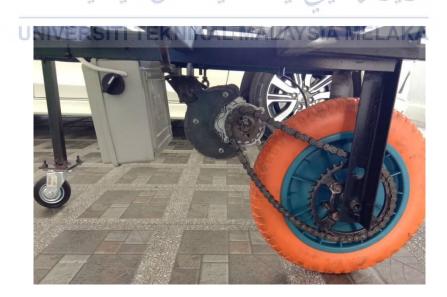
The Frame of the Motor Part attached with the Motorized Trolley
